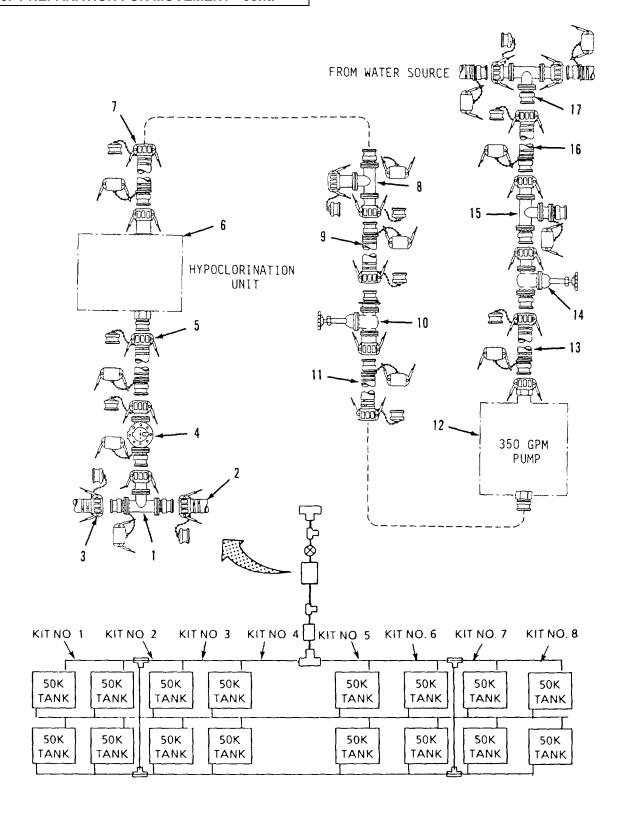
350 Gpm Pump Connection Kit (Water Source) Disassembly.
